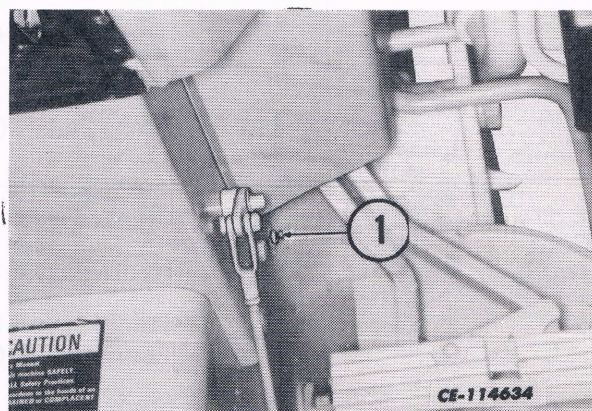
R.H. Clutch Release Shaft Lubrication Fitting
